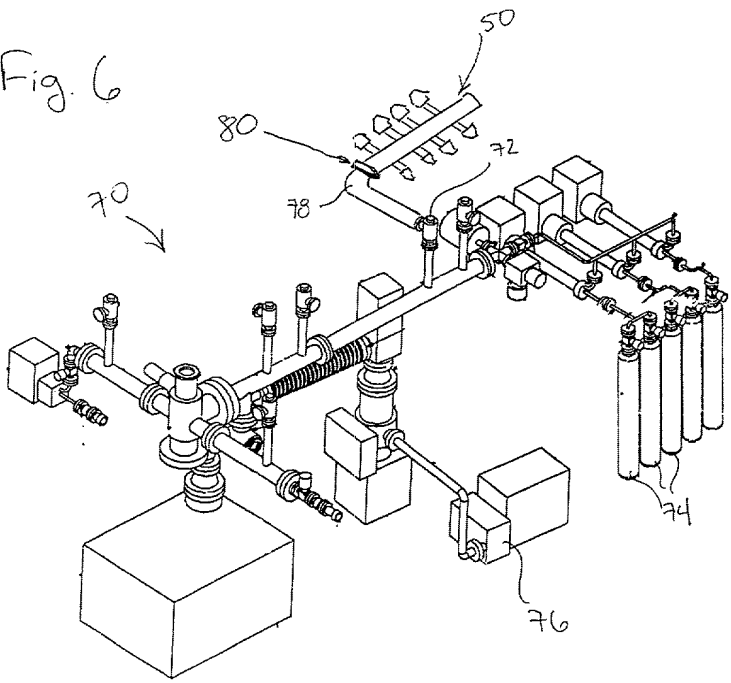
is a perspective view of the mechanical assembly shown in FIG. 5, with the components of the assembly labeled with reference numerals.
